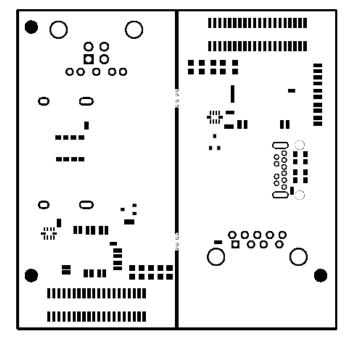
10G-EXPANSION-EVM Bottom Solder
